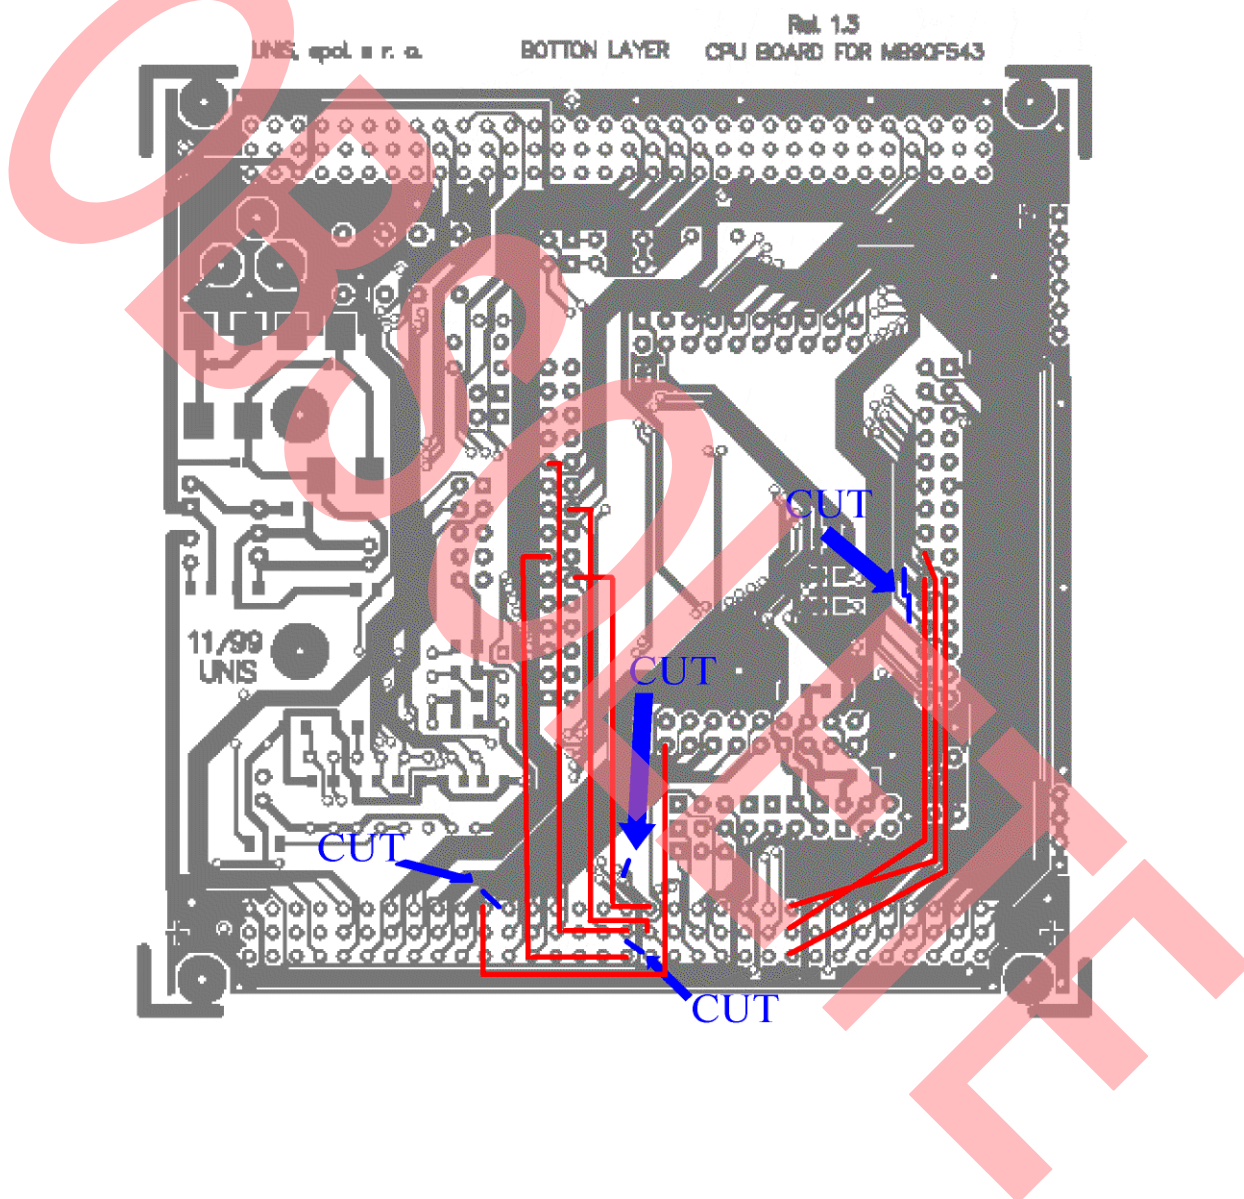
Bottom layout of MCU540 board, changes for MB90550 series
